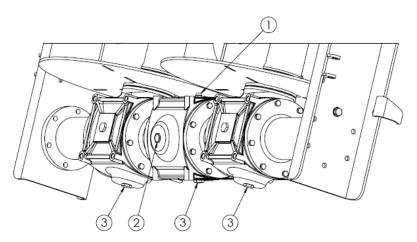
The oil-level check points of the floor-conveyor gearbox. 1 - oil inlet (vent), 2 - oil level sight glass, 3 - drain plug
